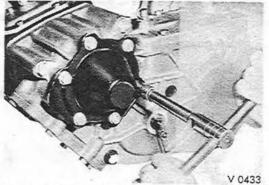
Removing the spline shaft cap from the transfer case.
